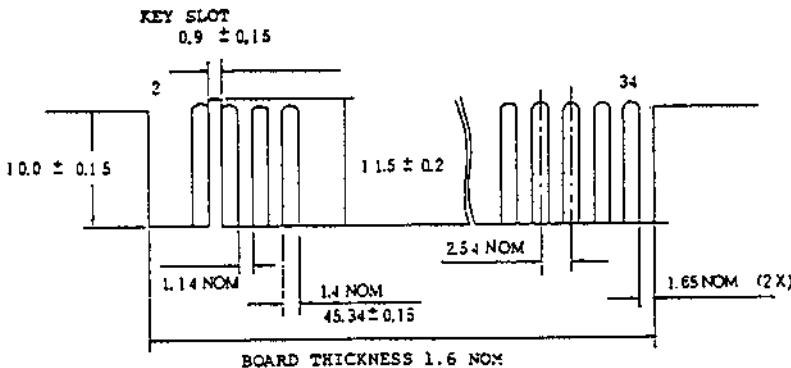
Connector J1 Dimensions (mm) and Pin Numbers
